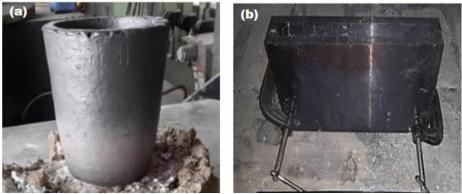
(a) Silicon carbide crucible (b) Mold used
